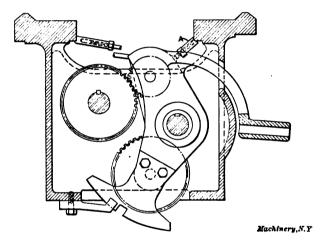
Method of Holding Tumbler when Drilling and Reaming the Locking Pin Holes by the Method shown in Fig. 7
